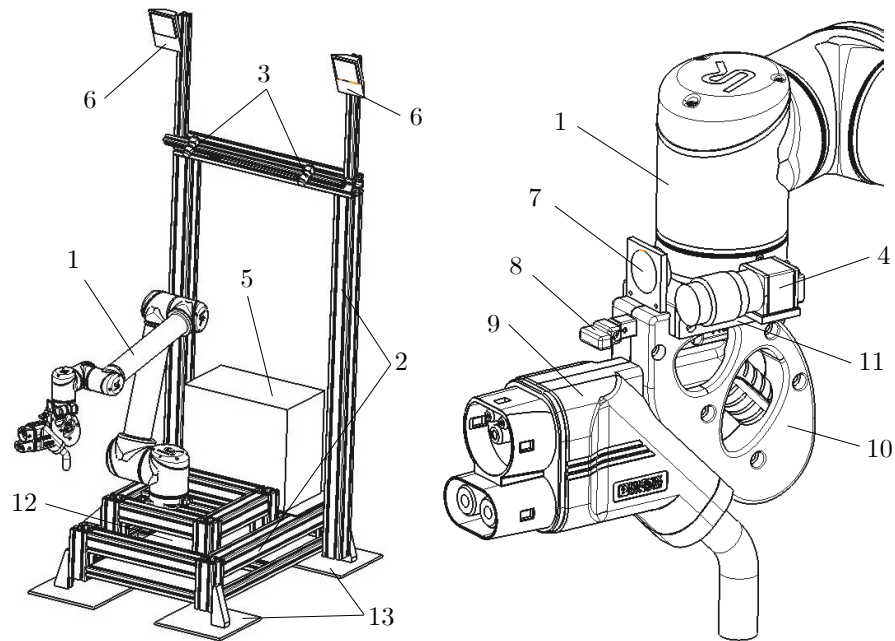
Left: CAD-model of the charging station prototype. Right: CAD-model of the robot head tool with CCS Type 2 connector, camera, LED, actuator and adapters.
